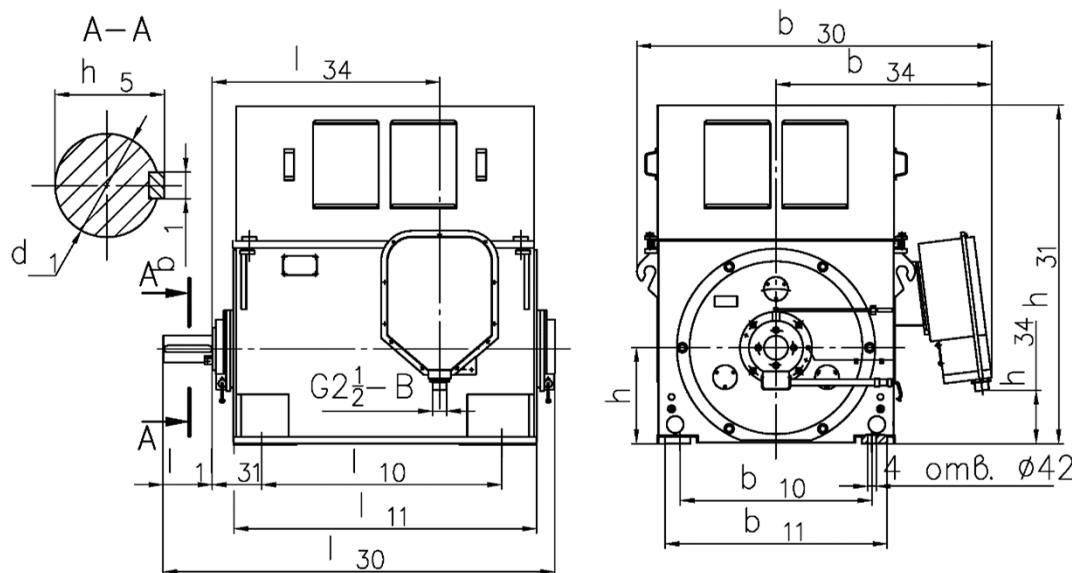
Overall and mounting dimensions of motors АД-315, 800, 1250
